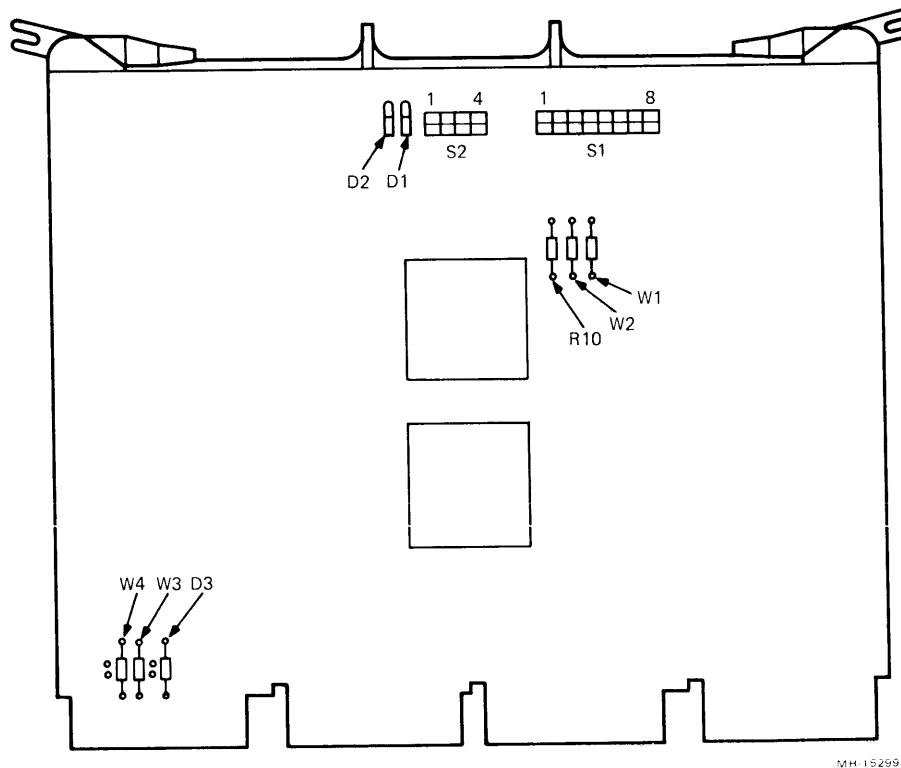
MSV11-JB/JC LED/Switch Pack/Jumper Layout
